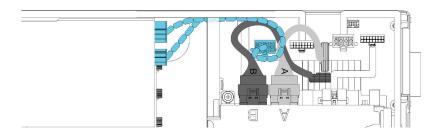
Routing PCIe#1-A, PCIe#2-B and the front riser auxiliary power cable
